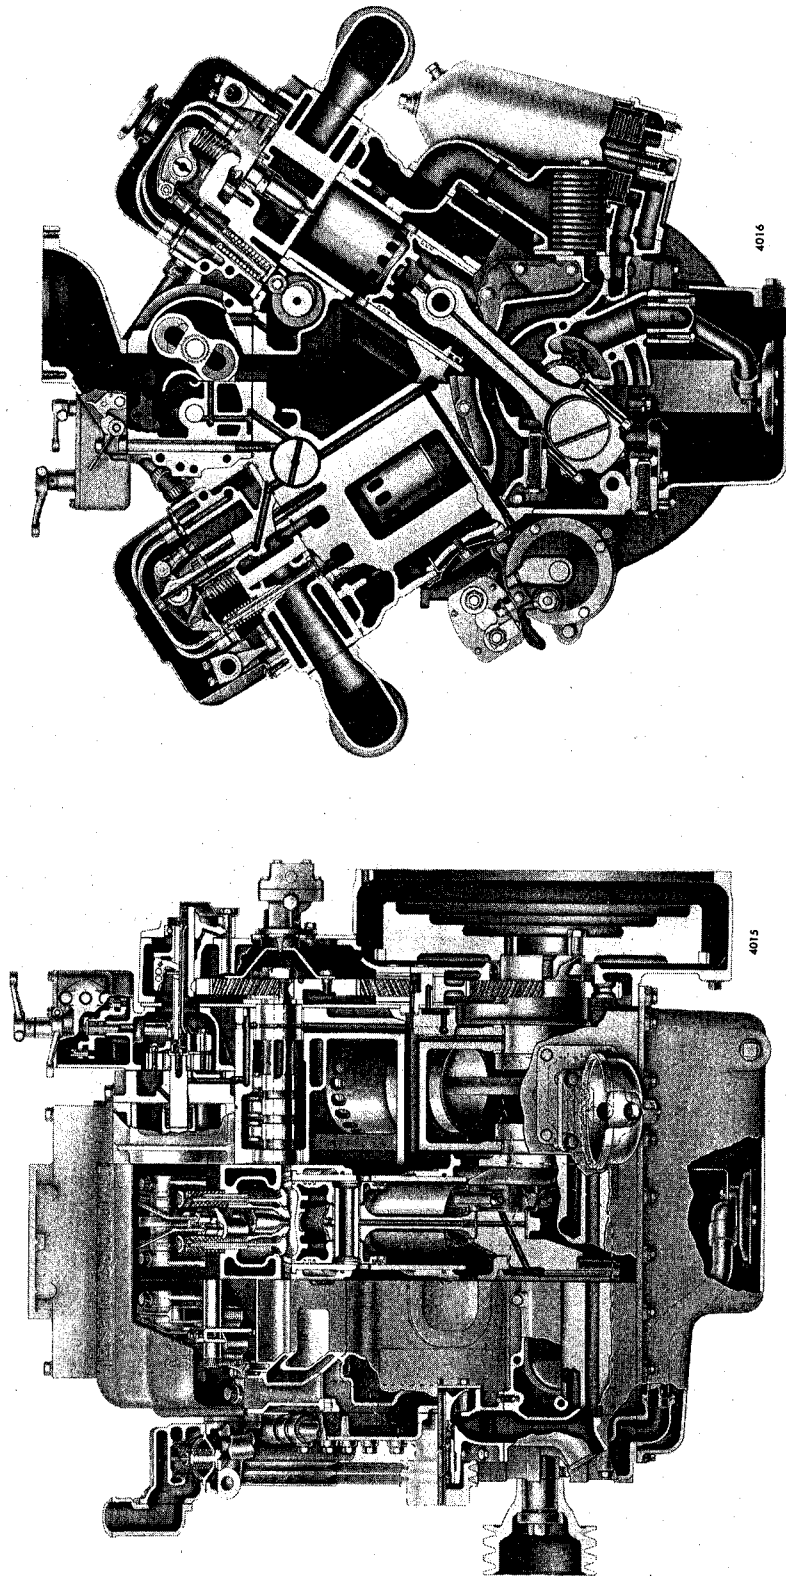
Cross Section Views of a Typical 6V-53 Engine
